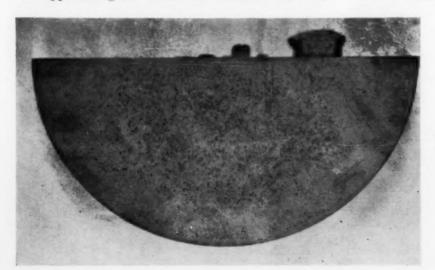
Test casting showing plate defect eliminated by reducing gate.
